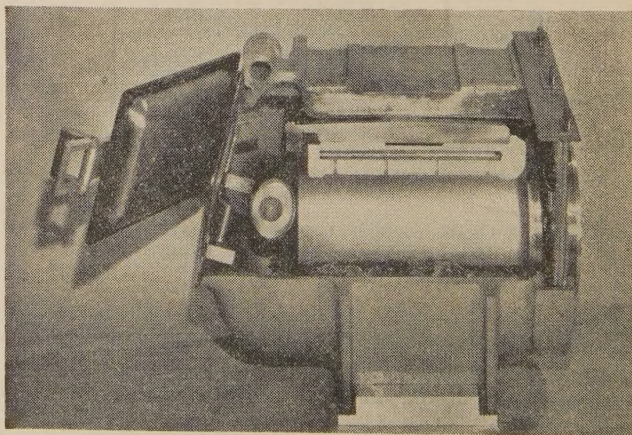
SOLID-TYPE-BEARING JOURNAL-BOX ASSEMBLY
